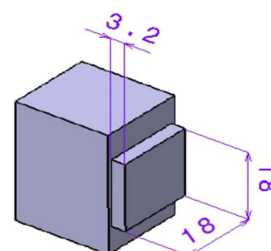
Step created on the block through milling to obtain final sample dimensions for XRD measurement.
